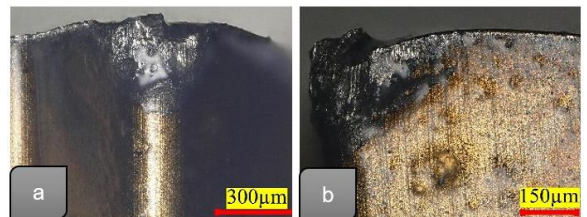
The wear images of the threading insert for run No. 2; a) View on tool nose, b) View on the flank
